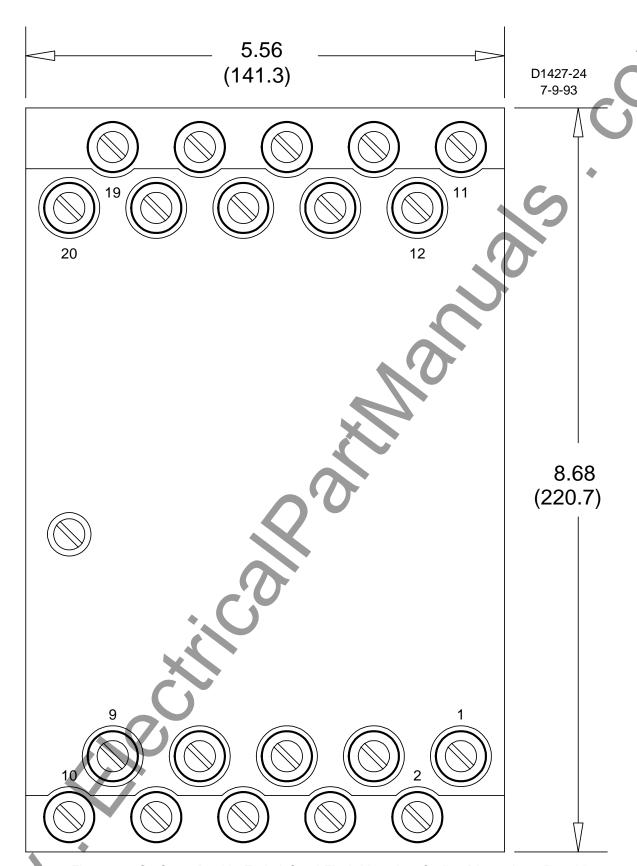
S1 Case, Double-Ended, Semi-Flush Mounting, Outline Dimensions, Rear View
